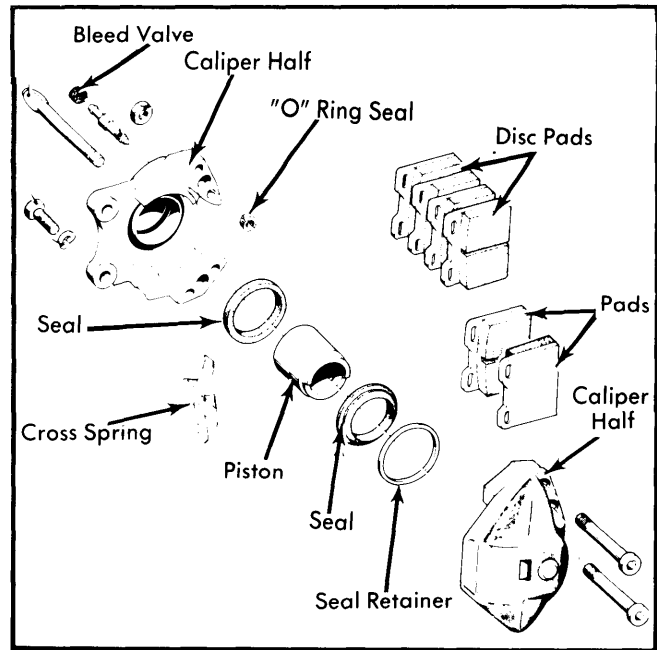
Disassembled View of Dual Piston Rear Disc Brake for 530i & 630CSi. Front Caliper for 320i is Similar
